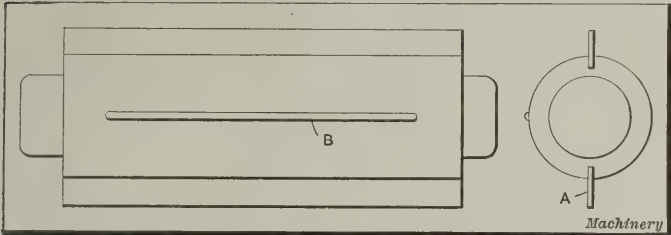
Mandrel for babbitting Plain Bearing Caps
